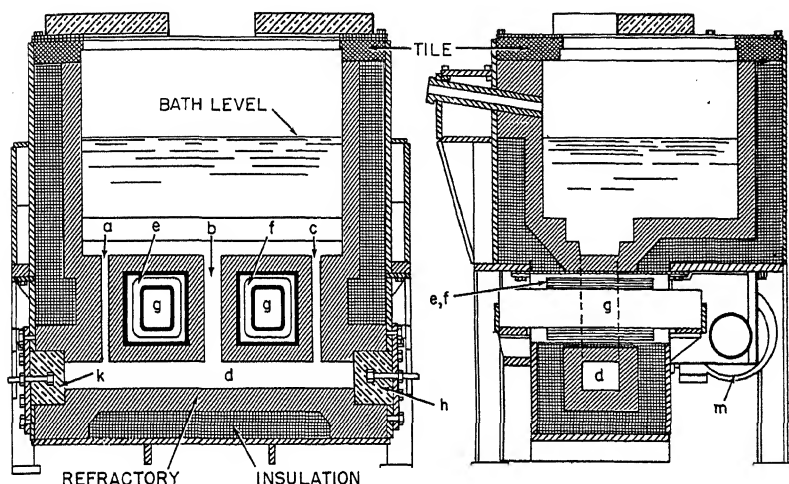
Aluminum melting furnace: *a, b, c*, channels for molten metal; *d*, chamber for collecting dirt and dross; *e, f*, transformer winding; *g*, transformer core; *h, k*, ceramic plugs; *m*, blowers for cooling of coil.⁷⁶
